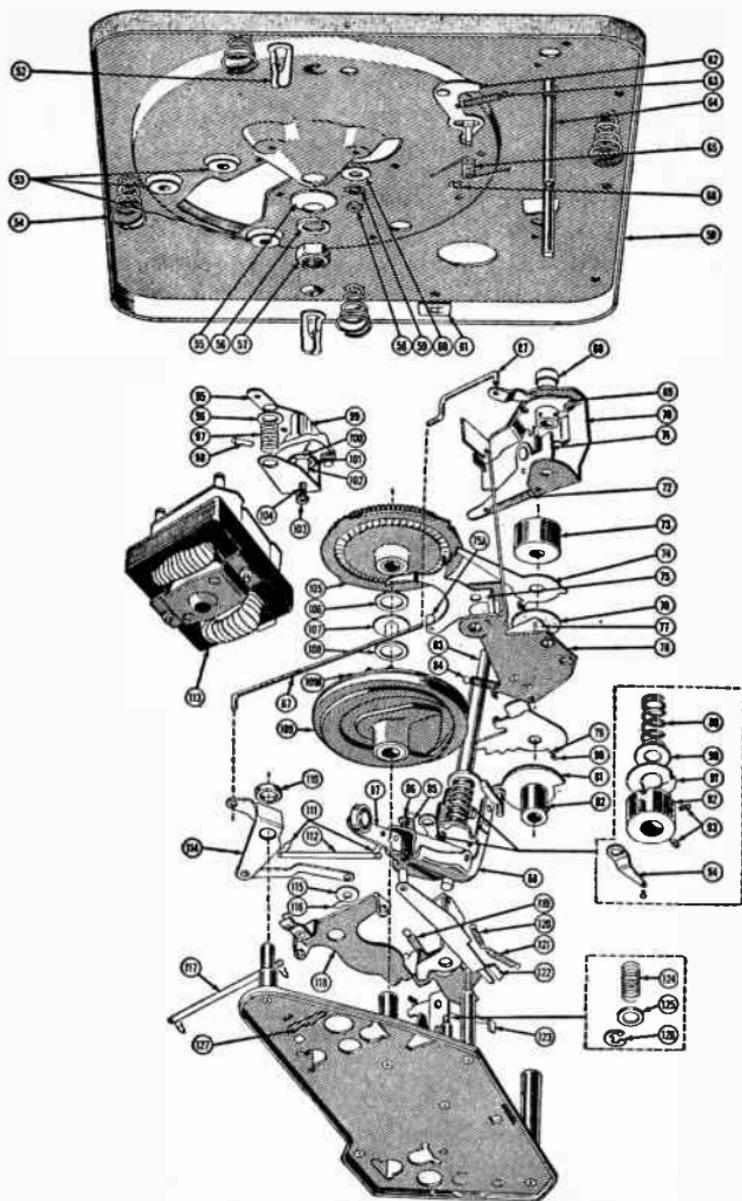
Exploded view of parts below baseplate in Webster automatic three-speed record changer.
